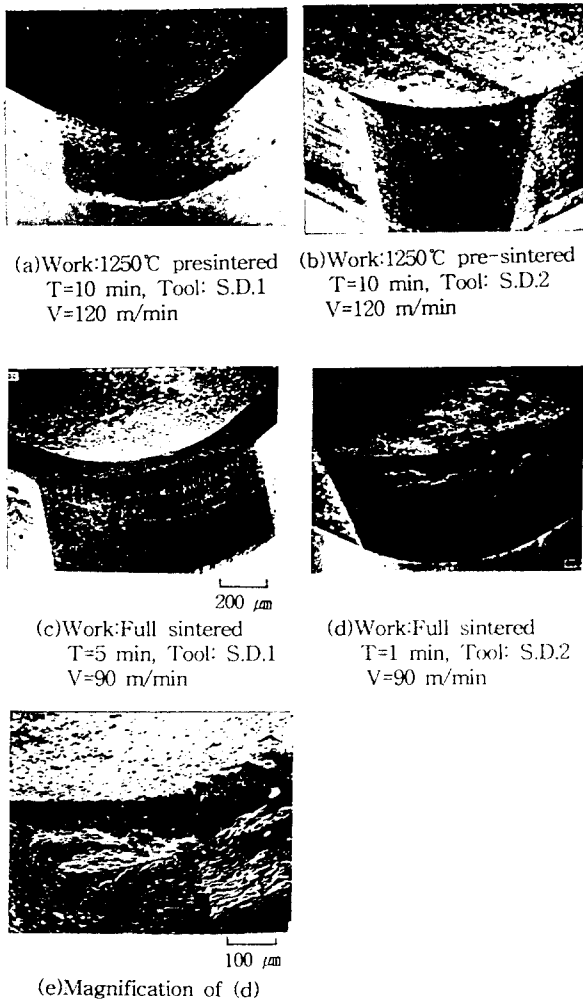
Typical wear patterns of sintered diamond tools in machining ceramics
